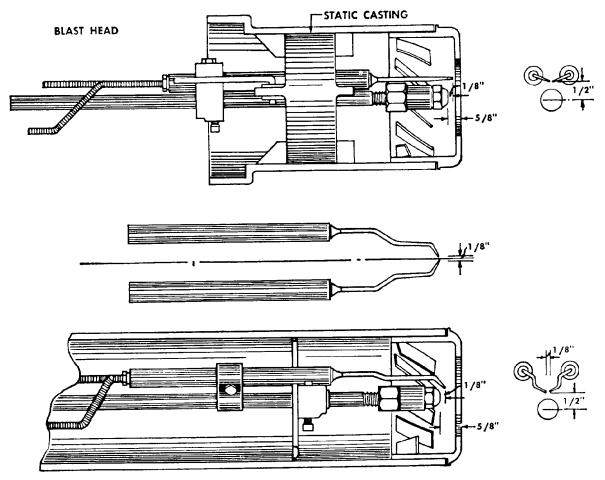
Settings of ignition points and nozzle for oil burner.
